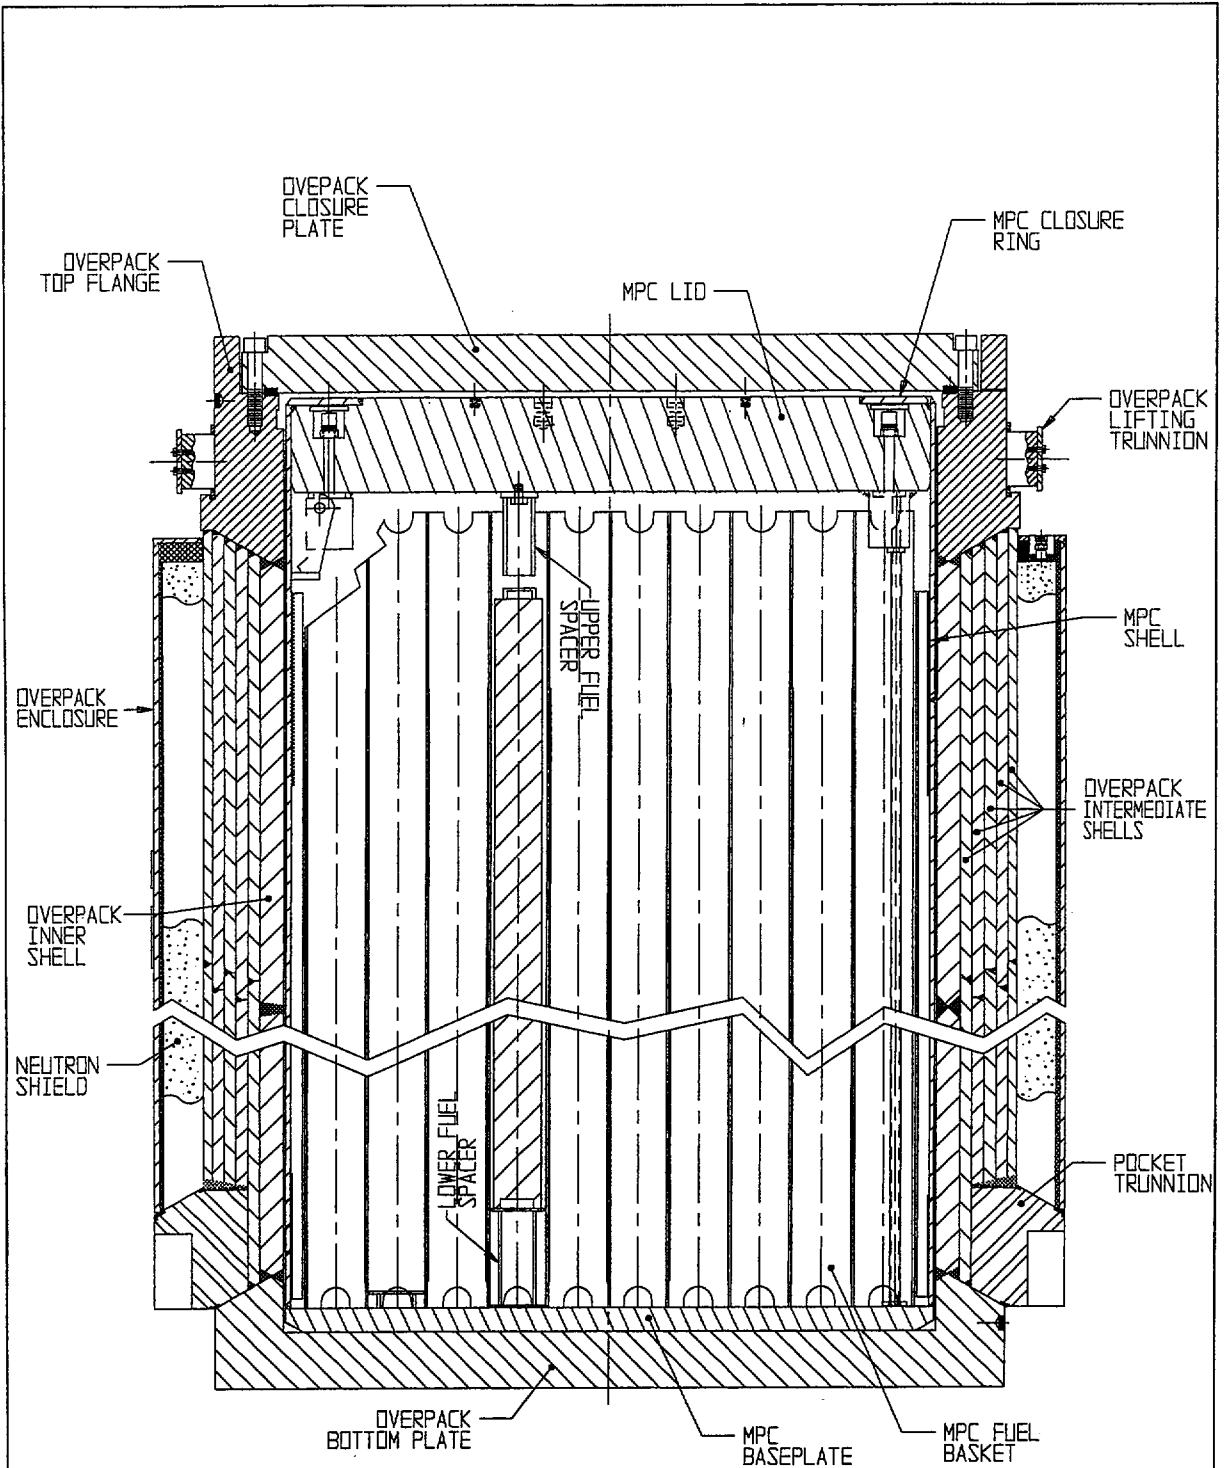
; CROSS SECTION ELEVATION VIEW OF HI-STAR 100 SYSTEM
